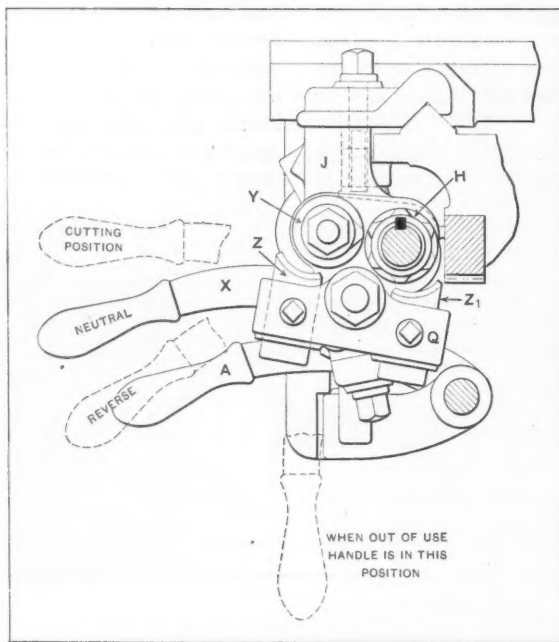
End View of Quick-threading Attachment shown in Fig. 4
